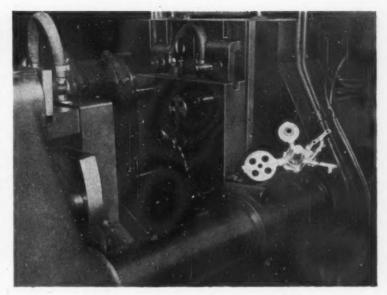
Close-up View of the Die Employed on the Triulzi Z30 Machine, Showing the Arrangement of the Cavities which Produce Four Different Sewing Machine Castings
